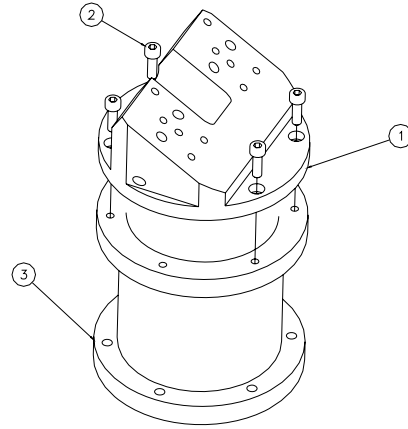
AGMD-278-US60 Dual Head Adapter Parts Identification (Top View)
